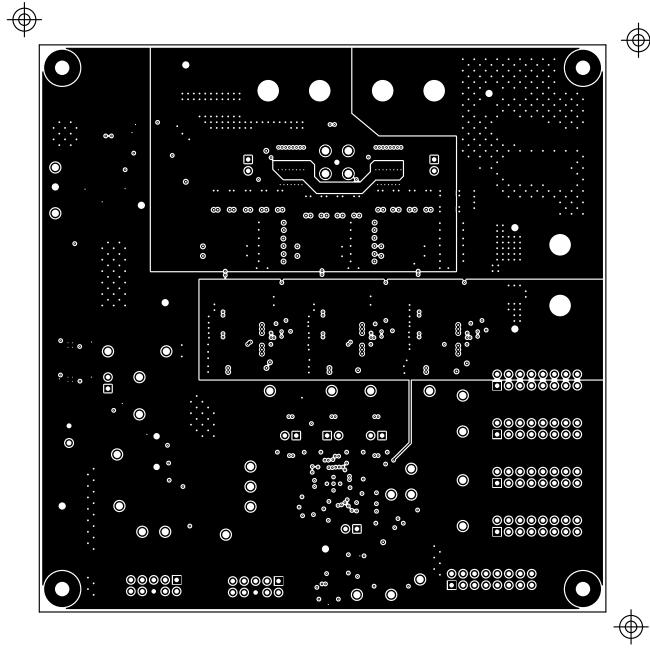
TPS59632Q1EVM-057 PCB Signal Layer 3
